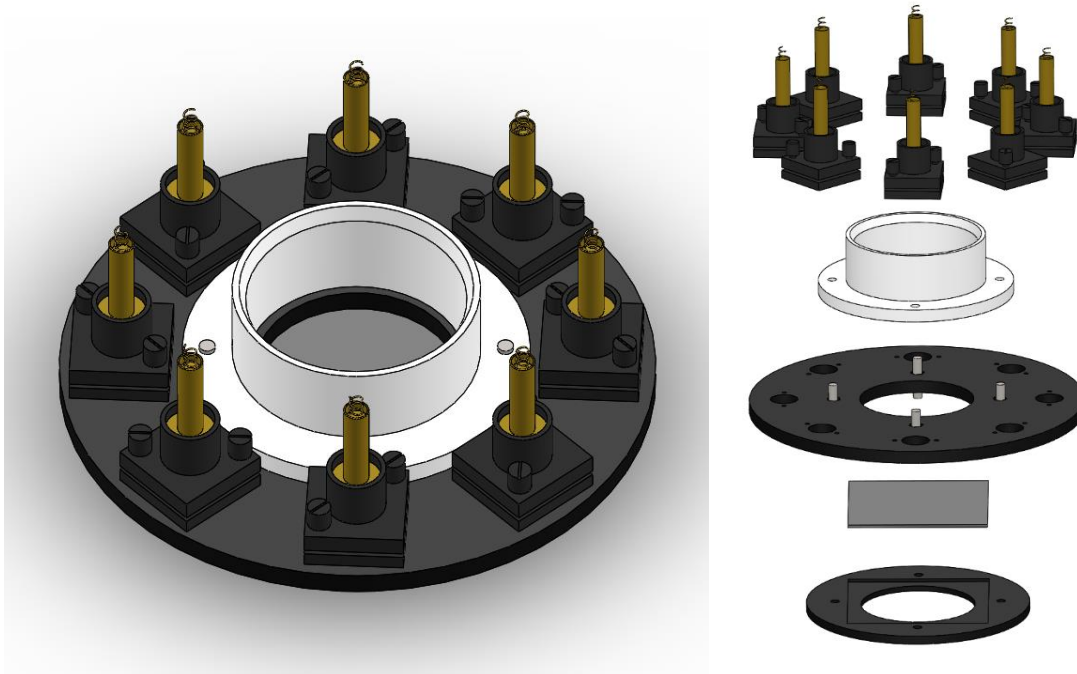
The CAD drawing of the lens and laser holder (left) and an exploded view of the lens and laser holder (right).
